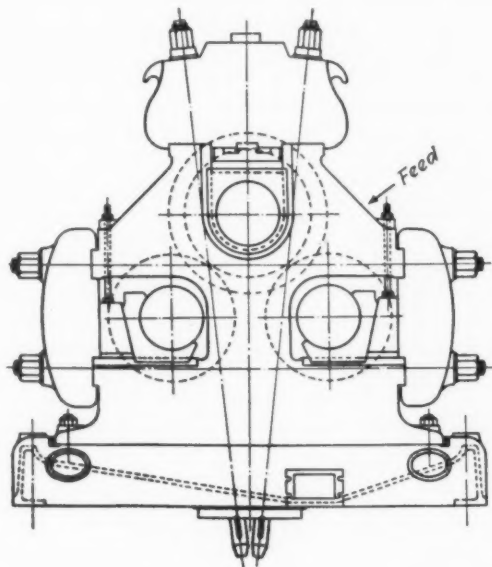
ROUSSELOT MILL HOUSING OF 1871
